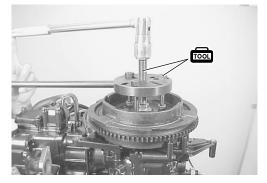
Flywheel holder09930-39411: Flywheel remover09930-39420: Flywheel remover bolt
